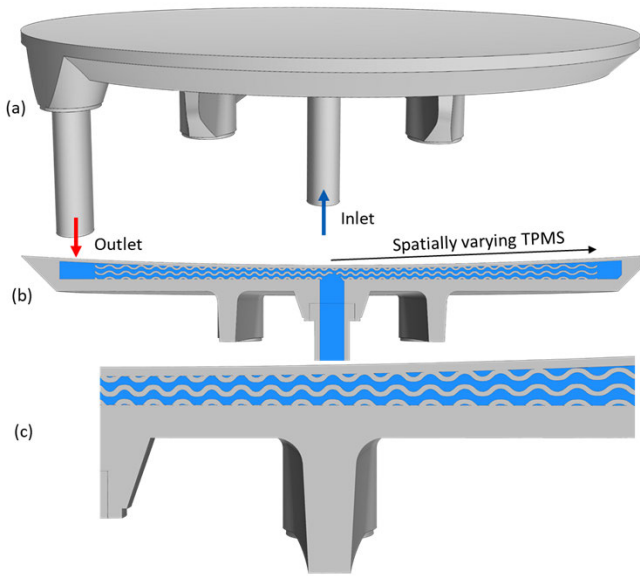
Prototype mirror geometry. (a) Solid domain with inlet/outlet. (b) Cut section highlighting the varying TPMS. (c) Zoomed-in view of the cut section.
